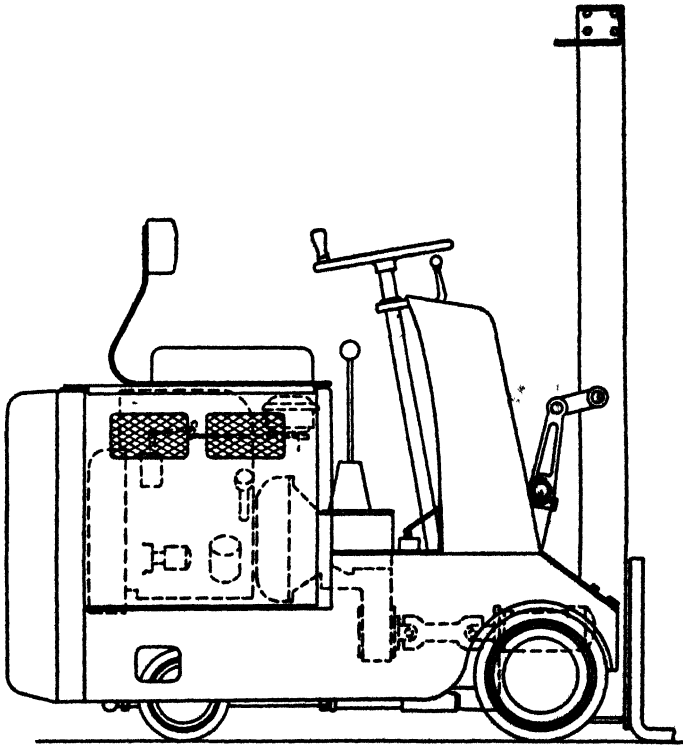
SIDE ELEVATION OF ELWELL-PARKER FORK TRUCK.
